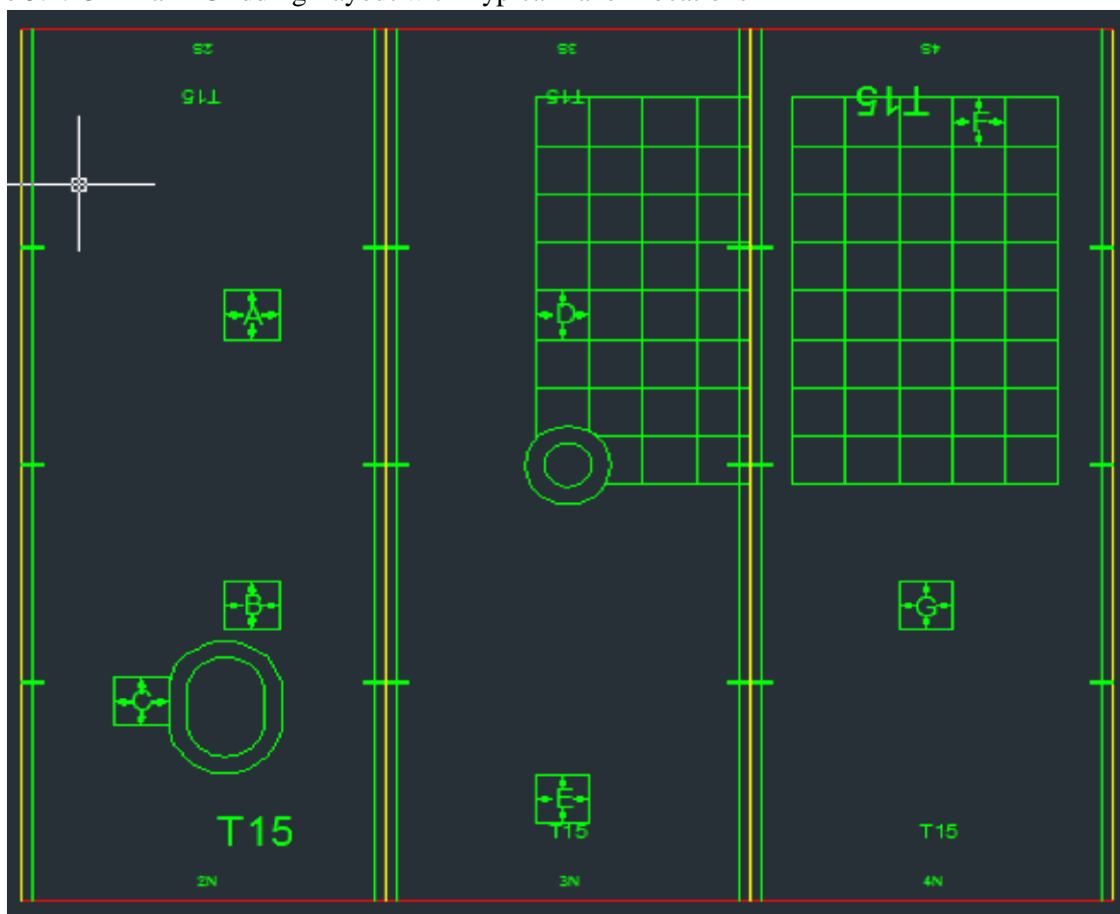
View of Tank Layout from Tank 29 Corner
